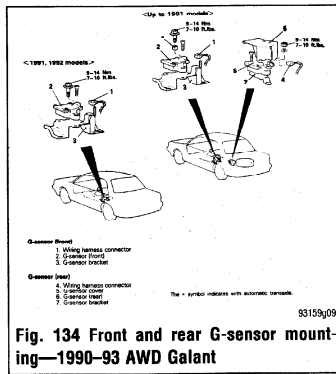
Front and rear G-sensor mounting—1990–93 AWD Galant
